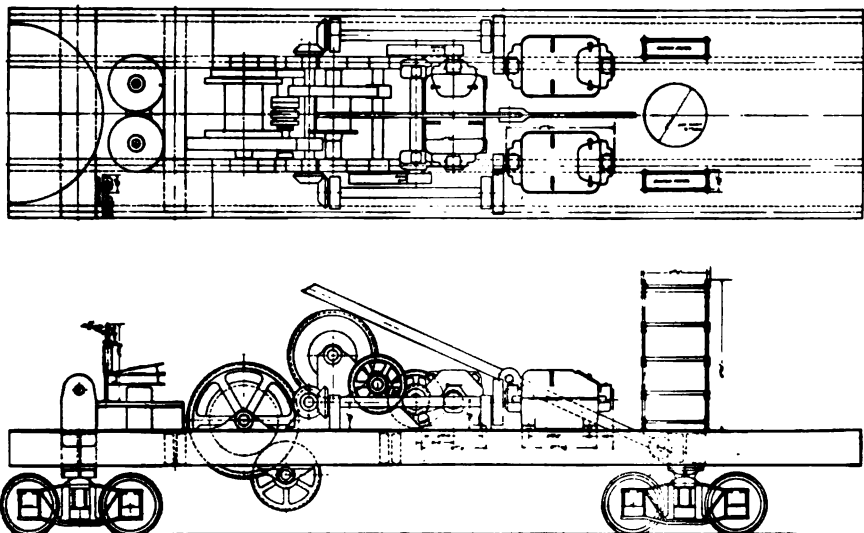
PLAN VIEW OF SHOVEL, SHOWING BEST METHOD OF LOCATING AND GEARING MOTORS TO HOIST AND SWING MACHINERY.
